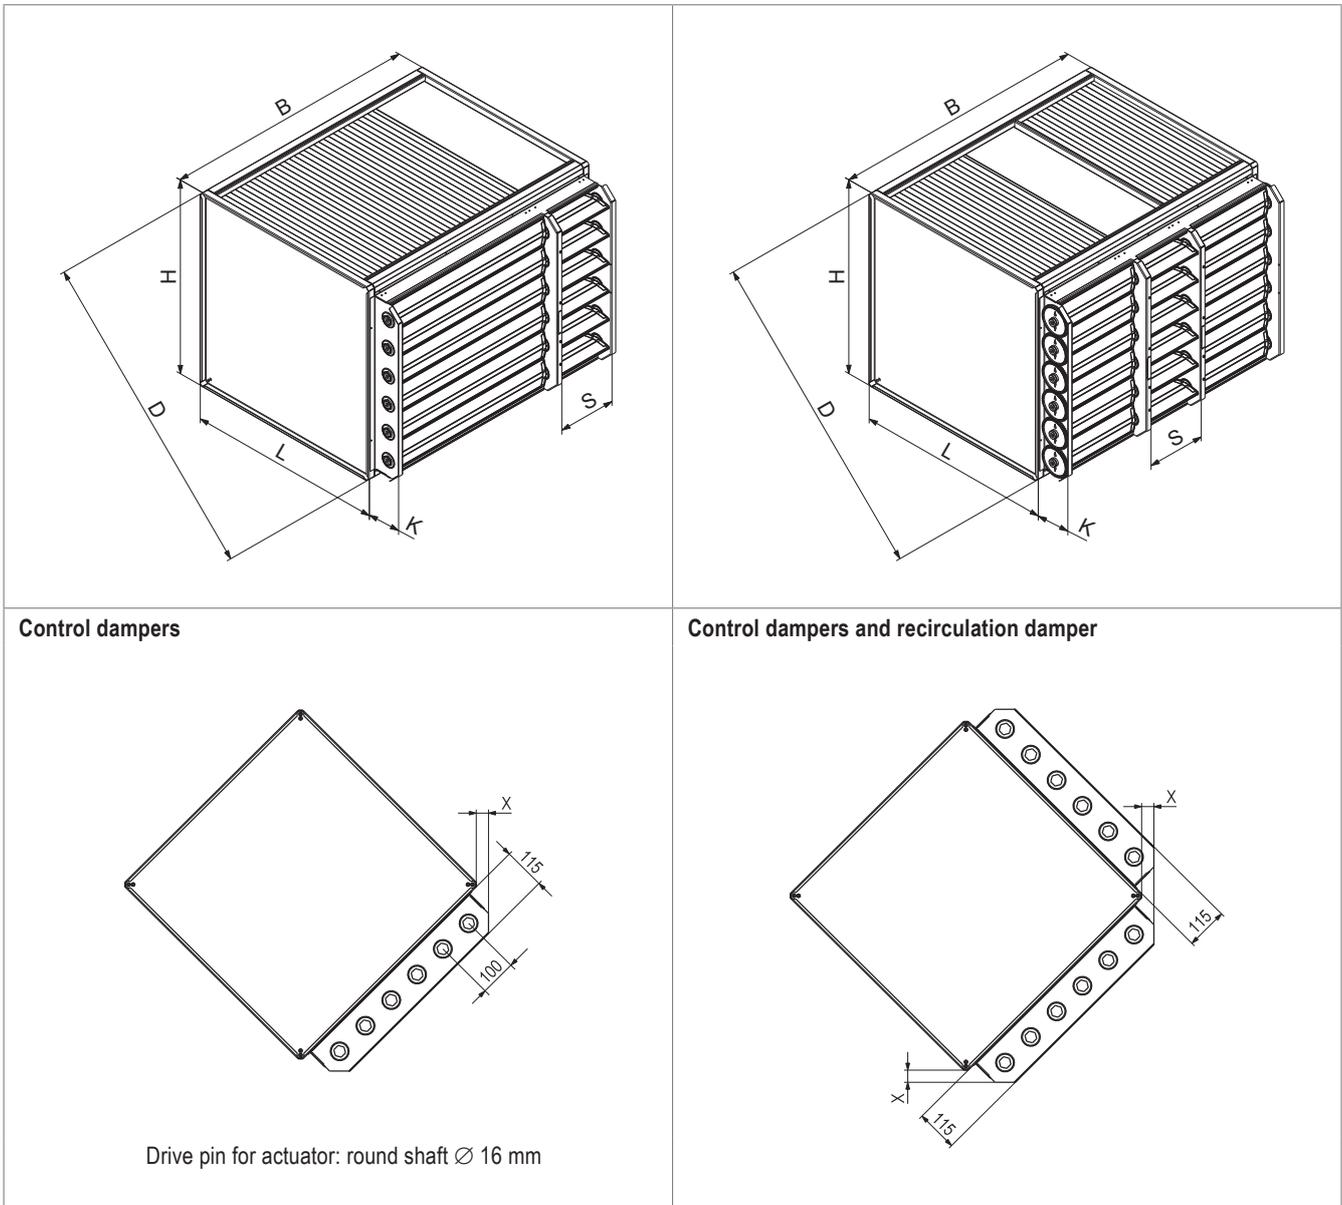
Dimension sheet for Krivan plate heat exchanger with dampers (dimensions in mm)
